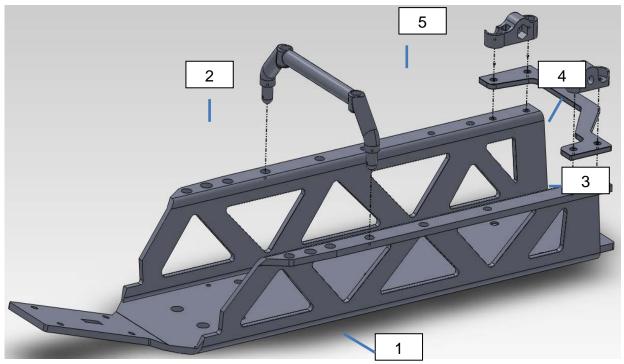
5b: Exploded view of the first META-iFAB assembly exercise - chassis part.
